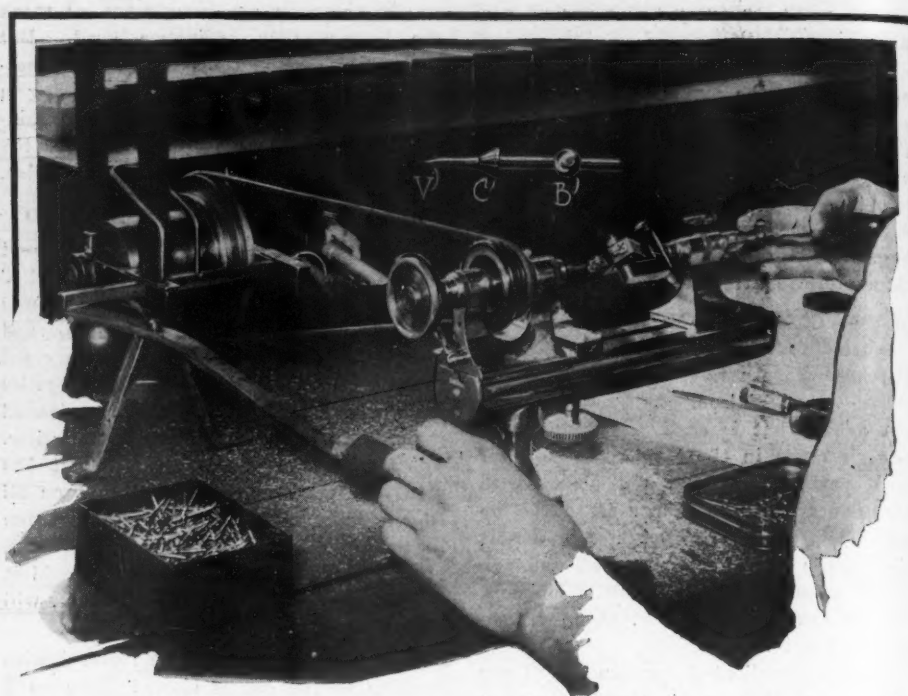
WATCHMAKER'S LATHE IN CARBURETER WORK
